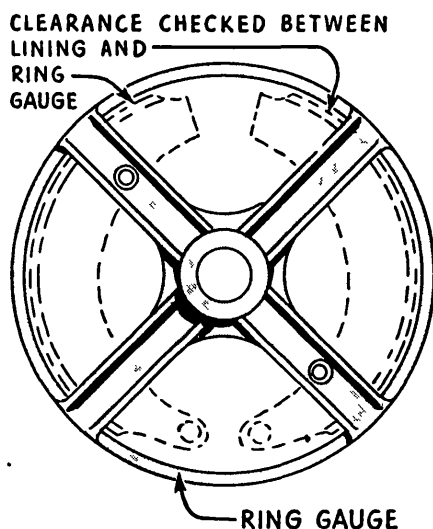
Show use of dummy drum or ring gauge to check brake shoe clearance on Lockheed brakes
